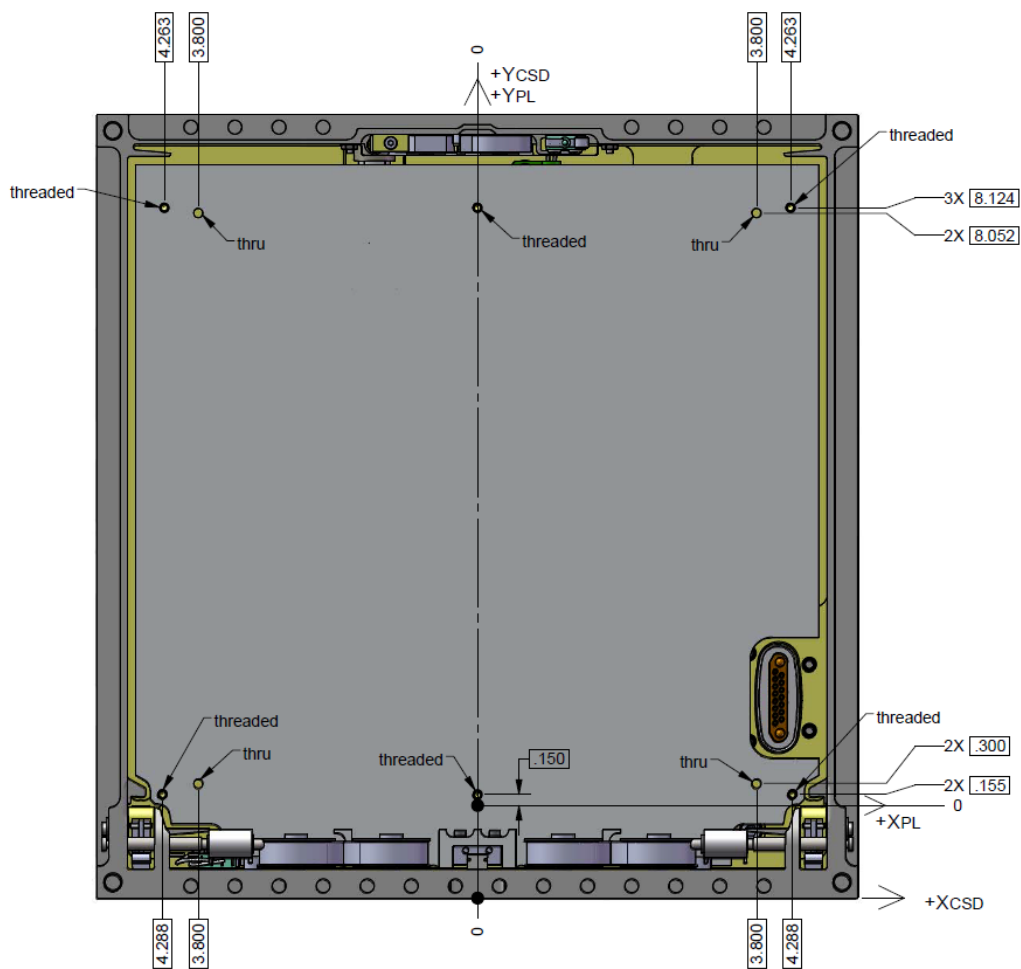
Payload mounting holes to CSD Ejection Plate or Back Plate, 12U
